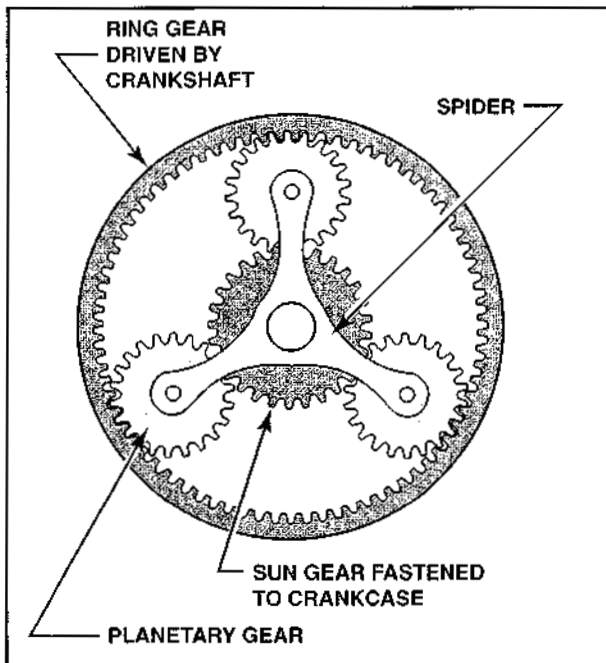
In a planetary gear reduction system, the propeller is attached to the planetary gear spider and the crankshaft turns either the sun gear or the ring gear.
